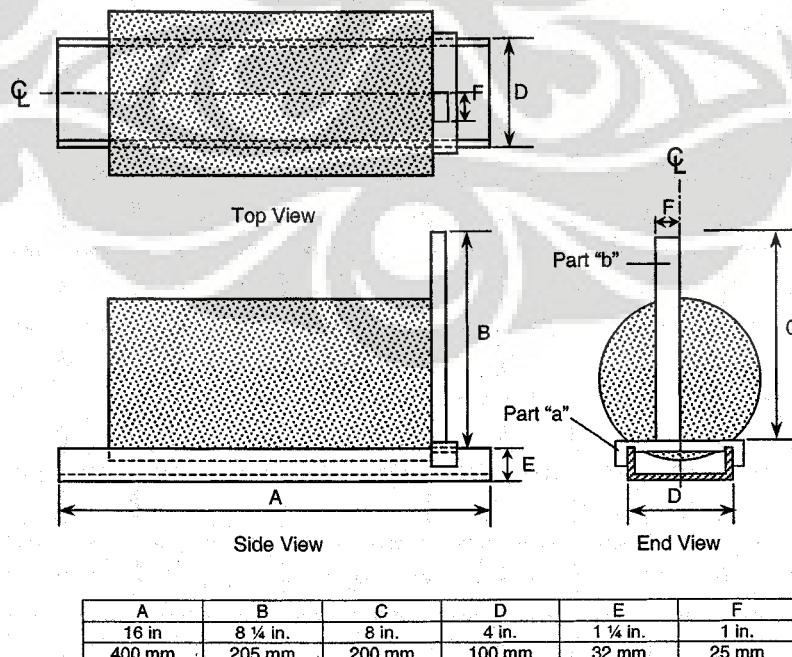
General Views of a Suitable Apparatus for Marking End Diameters Used for Alignment of Specimen in Testing Machine
